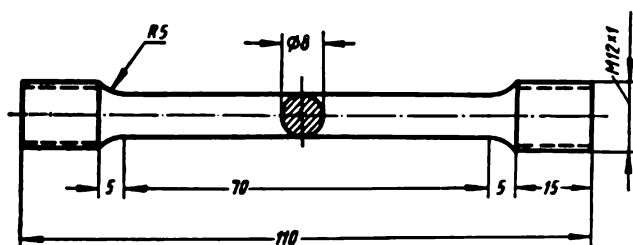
Sketch of a butt-soldered test specimen for testing the tensile strength of a soldered joint
